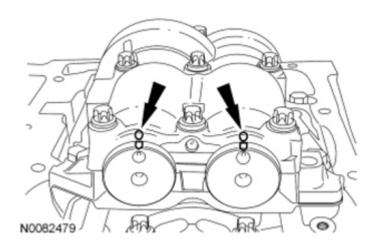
Locating Balancer Unit And Shafts Reference Mark
